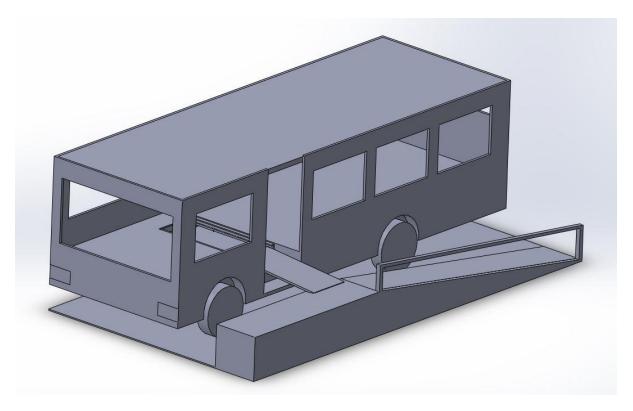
Ramp-Channel Assembly Installed on Bus 3D
